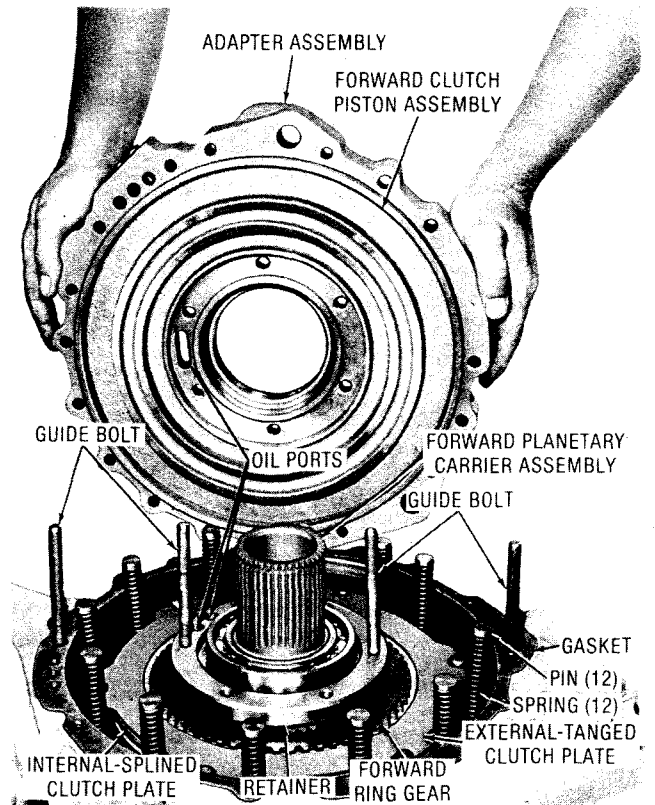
Installing rear housing adapter assembly (TRT-3 overdrive)
